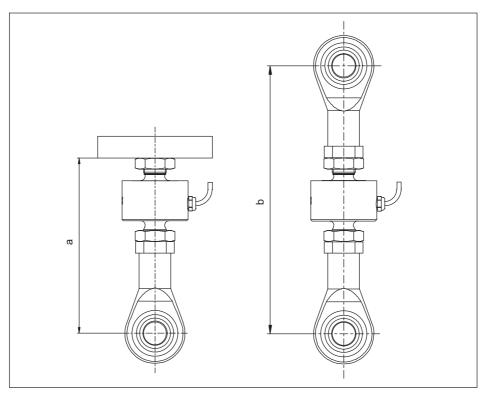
U9C dimensions when using one or two knuckle eyes.
